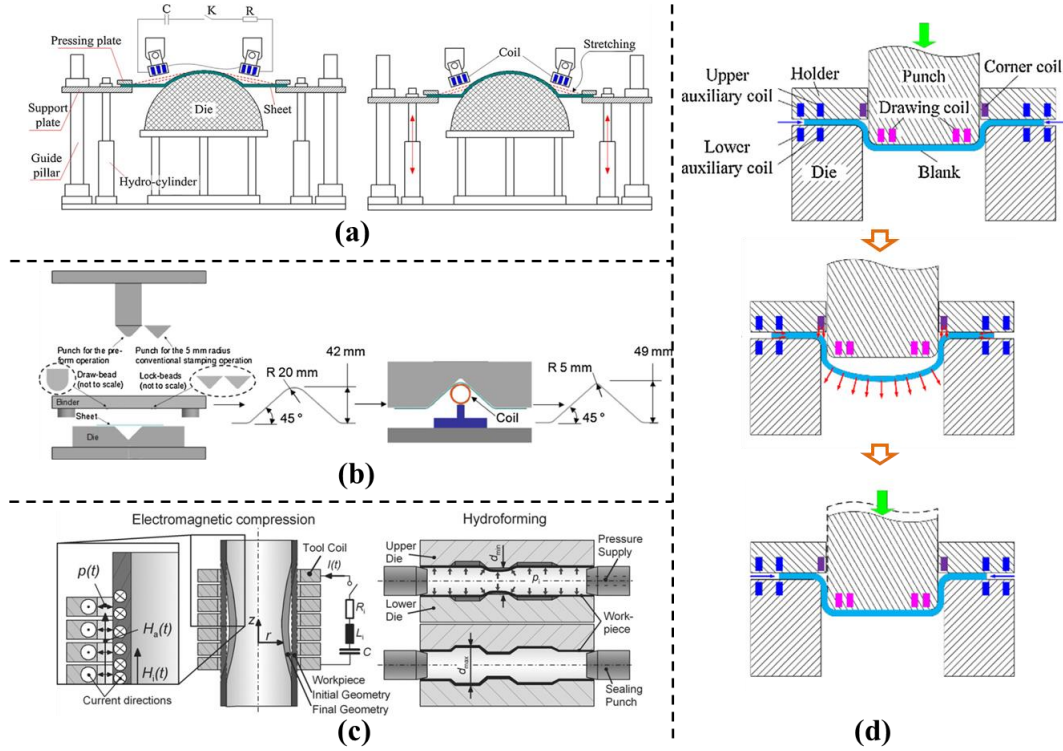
Combined electromagnetic forming with (a) stretch forming [245], (b) stamping [247], (c) hydroforming [248], (d) incremental drawing [249].
